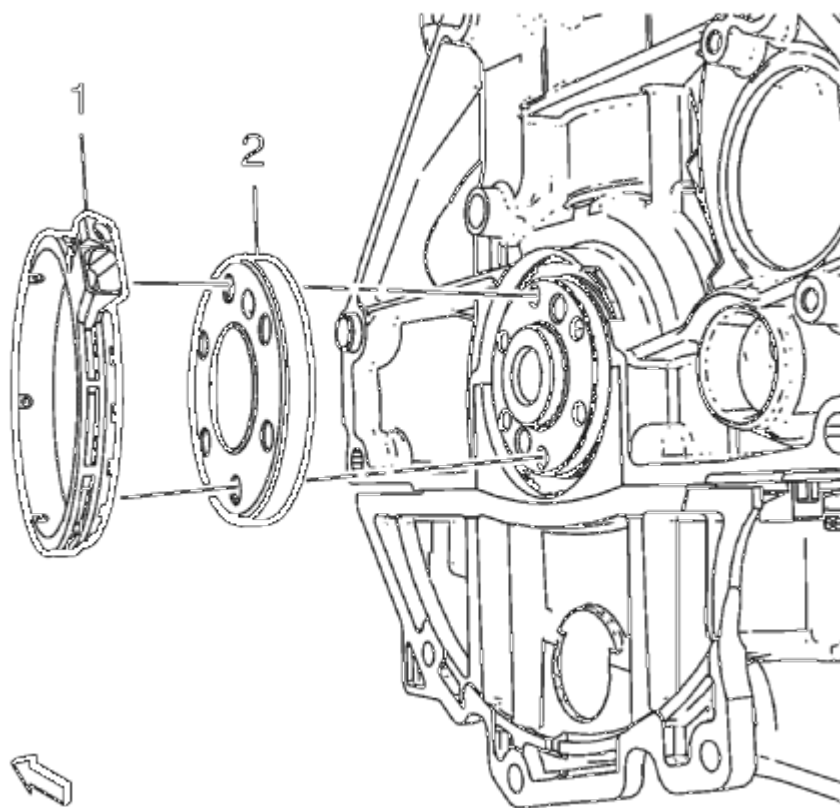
Crankshaft Position Sensor Reluctor Ring And Oil Seal Housing
